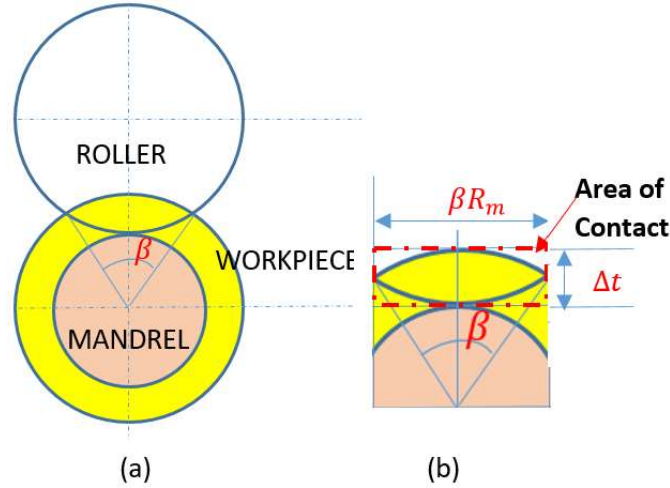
(a) Schematic diagram representing front view showing interaction zone between the roller and the workpiece (b) contact area taken in investigation
